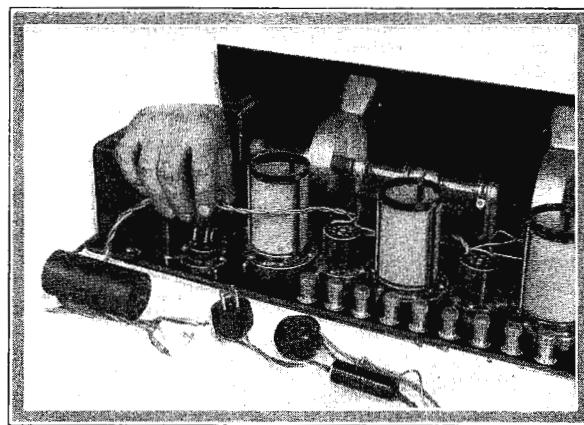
This photograph shows the Carter adapter harness placed in a storage battery operated receiver for conversion to alternating current
